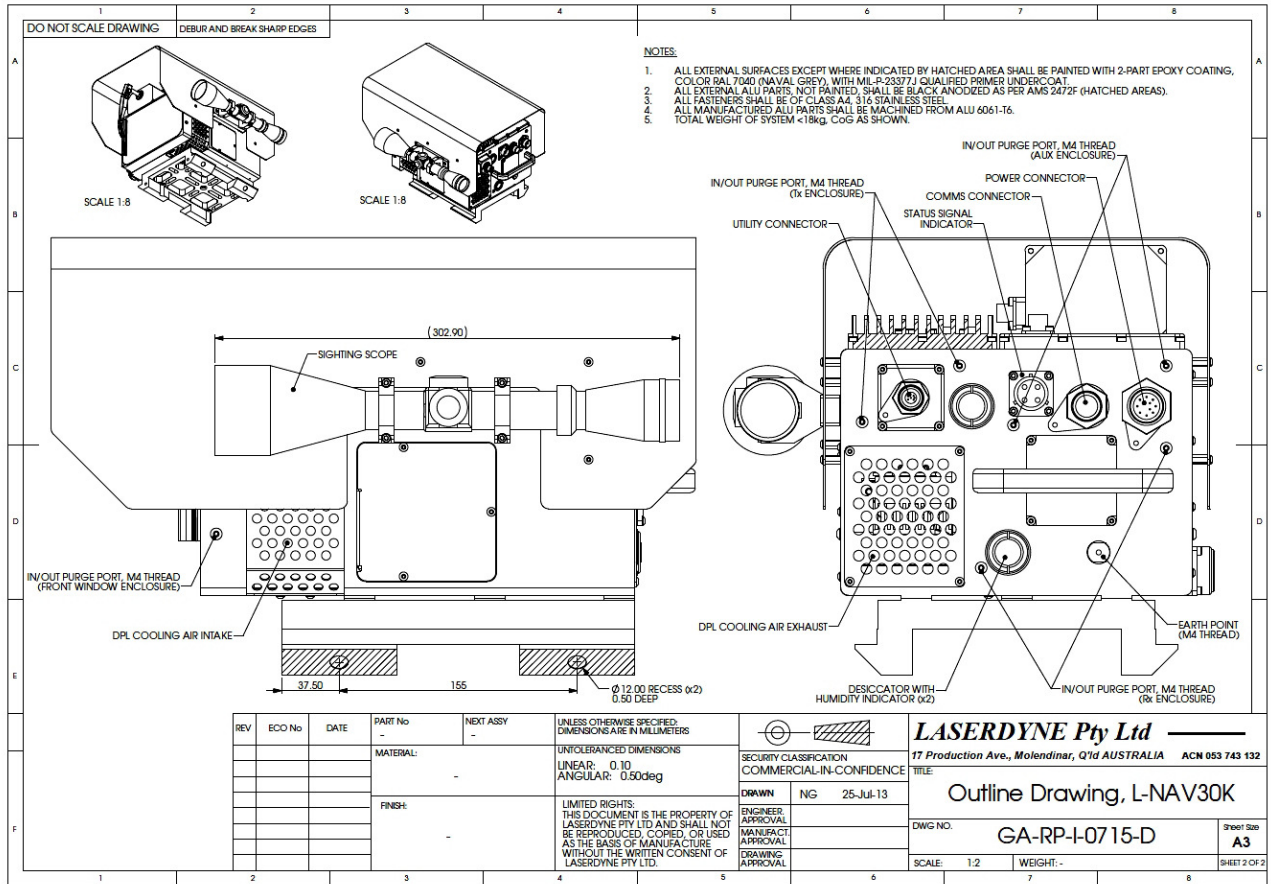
Outline Drawing Right, Rear & 3D Views
